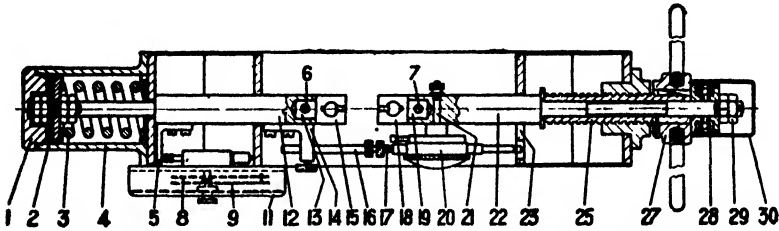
PRINCIPLE OF THE GRIFFIN-GALE TESTING MACHINE
